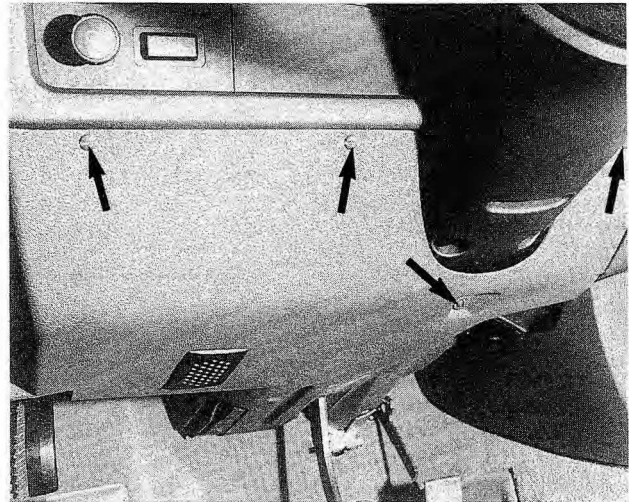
Retaining screws (arrows) to be removed from left-side instrument panel trim.
